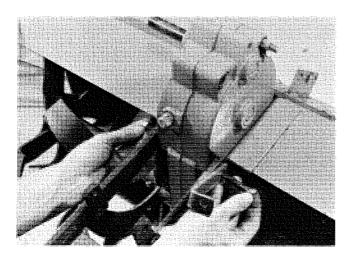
Install Hitch & Spring Bracket Using $\frac{3}{8}$ -16 x $5\frac{1}{2}$ Bolt
